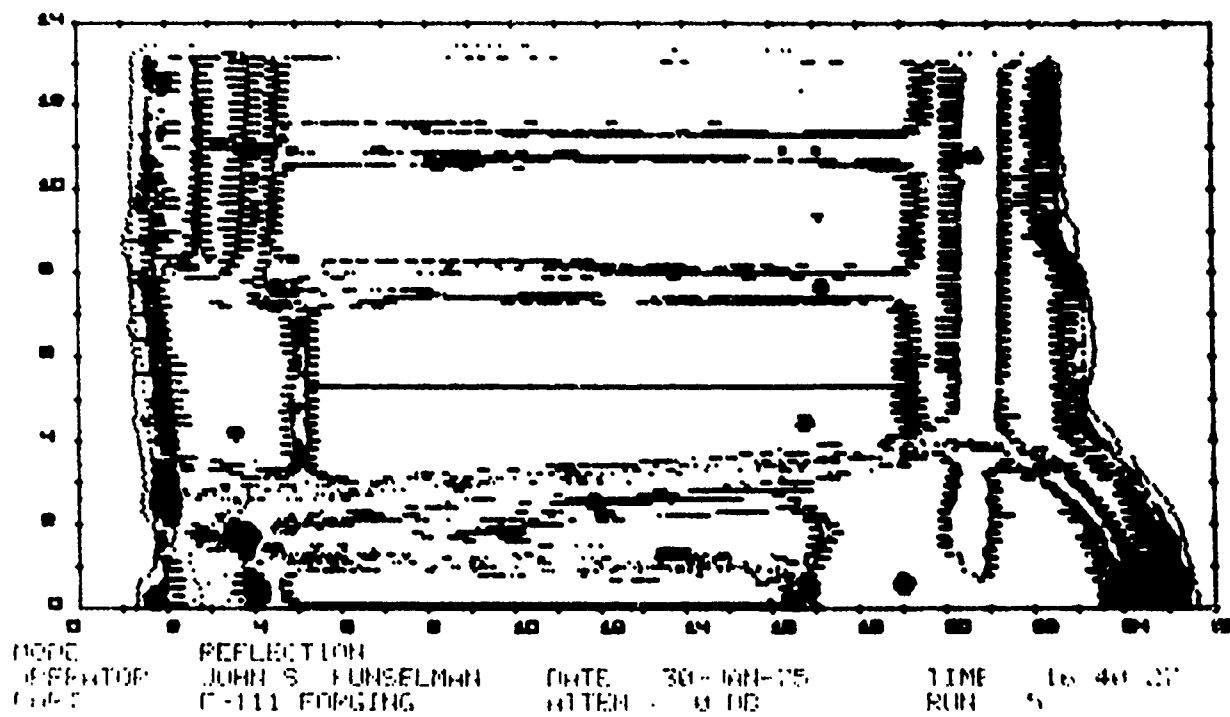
Near-Real Inspection Record for the Compressional Scan of F-111 Aluminum Forging
